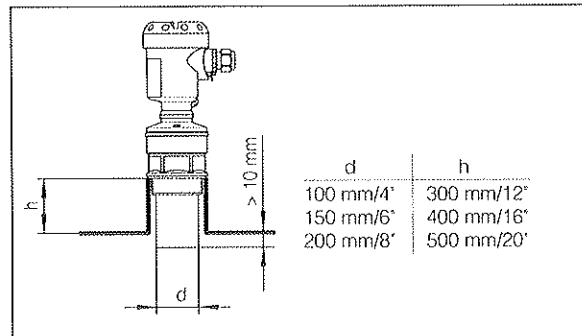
Deviating socket dimensions with OPTISOUND 3020 C
